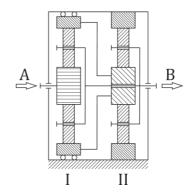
Schematic overview of the two-carrier, single speed planetary gear train S13WN
